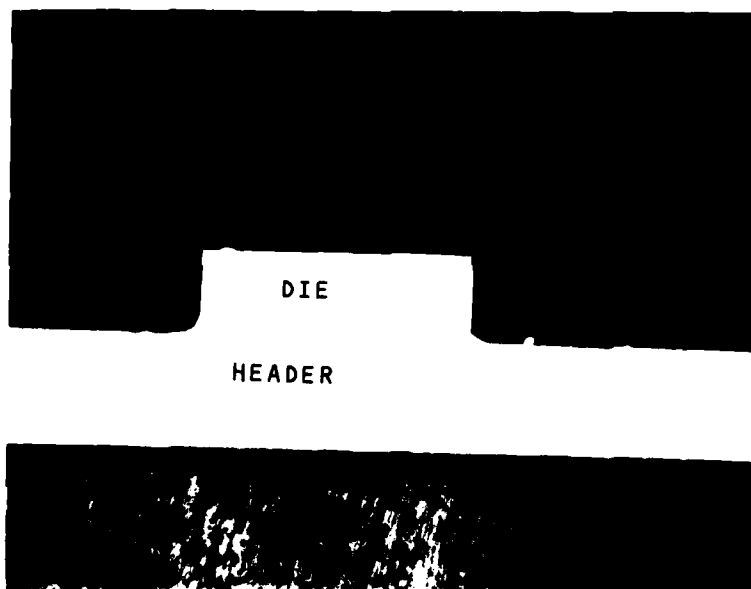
CROSS SECTIONAL VIEW OF SAMPLE AFTER FINE GRINDING
